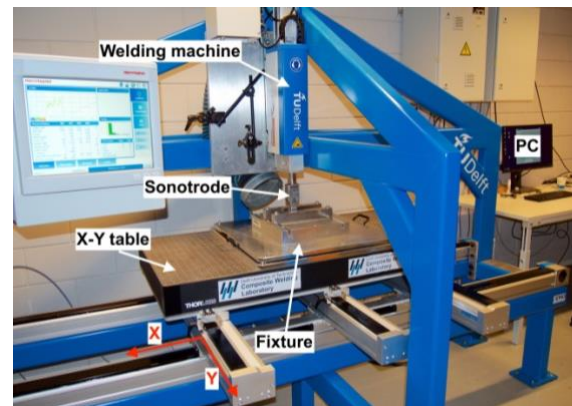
New continuous ultrasonic welding machine developed by the TU Delft. The welding machine is the VE20 Slimline dialog 6200 from Herrmann Ultrasonics working at 20 KHz.
